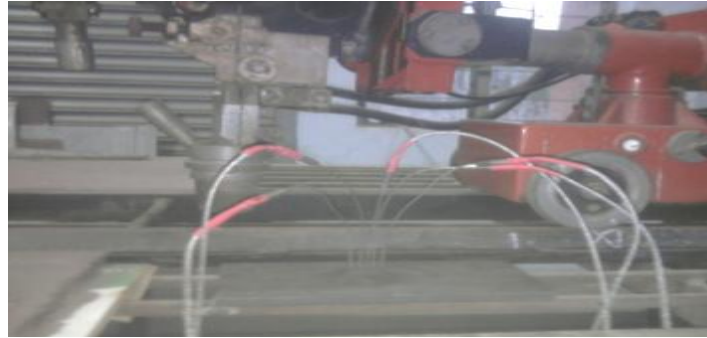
welding setup, base plate and position of thermocouple
